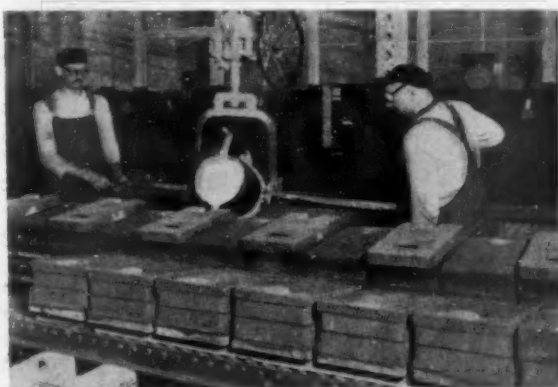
Pouring Arrangement. Molds Are Poured by Special Pouring Crews.
